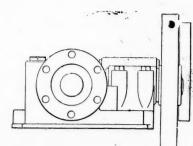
Air Compressor for Brake on Electric Freight Car.
